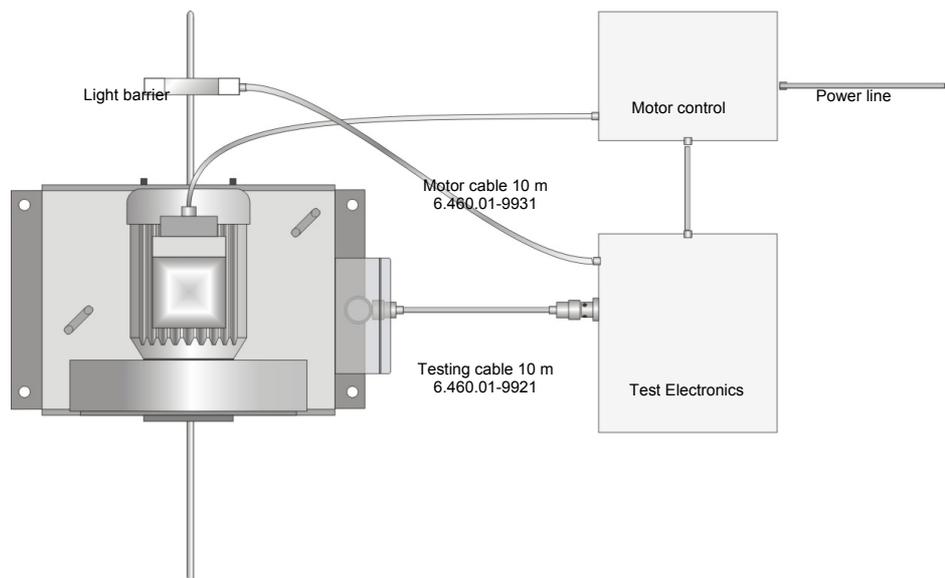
Connection 2-channel rotating head to CIRCOGRAPH DS
